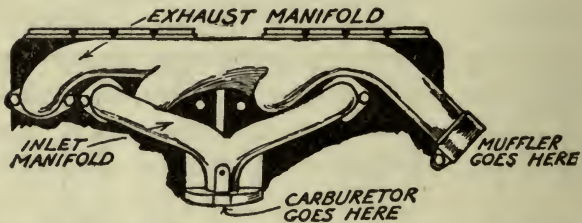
THE MANIFOLDS OF A FOUR-CYLINDER ENGINE
